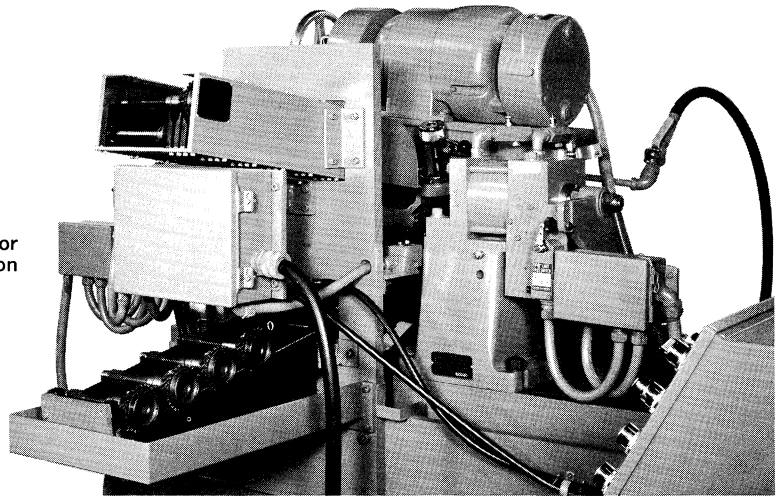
The Red Ring Model GHG gear tooth honing machine.
